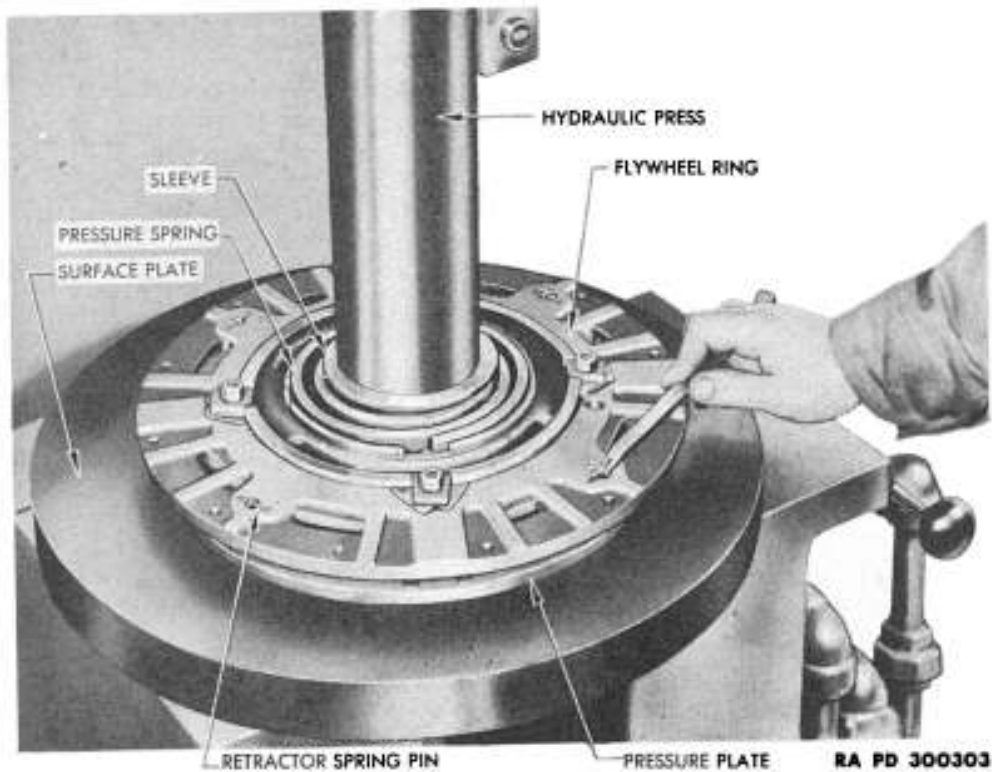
Removing Pressure Plate Retractor Spring Pin
